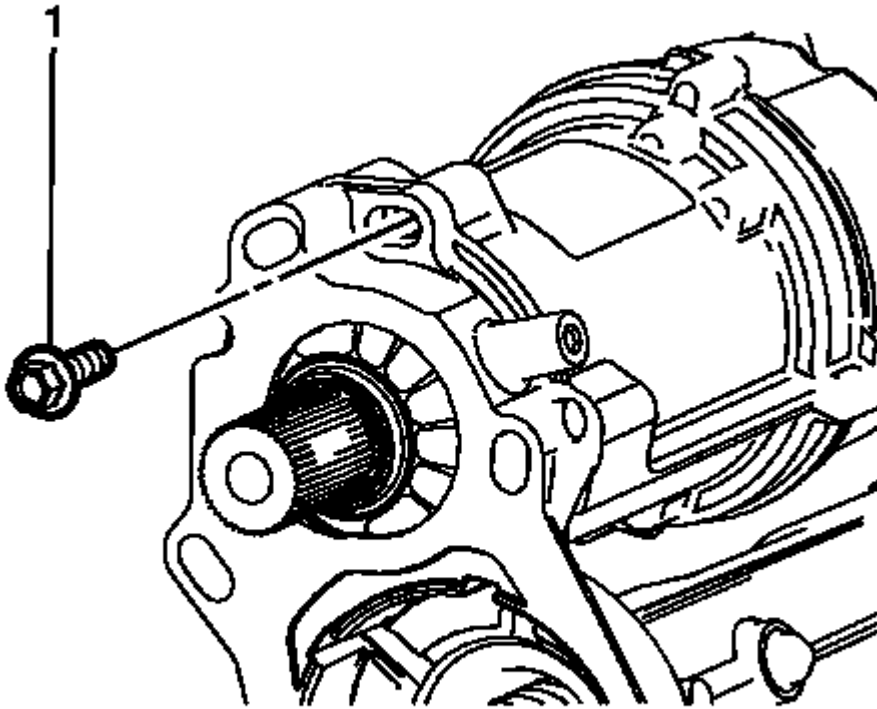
Power Steering Assist Motor Assembly Pivot Bolt
